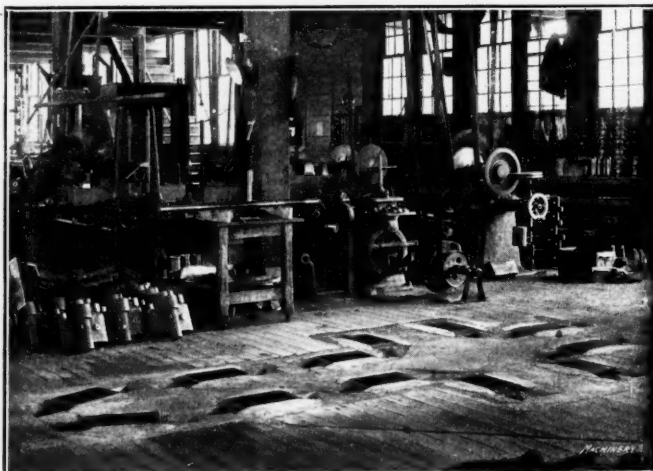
Completed Foundation, with Adjusting Plates for Beaman & Smith Milling Machine.
